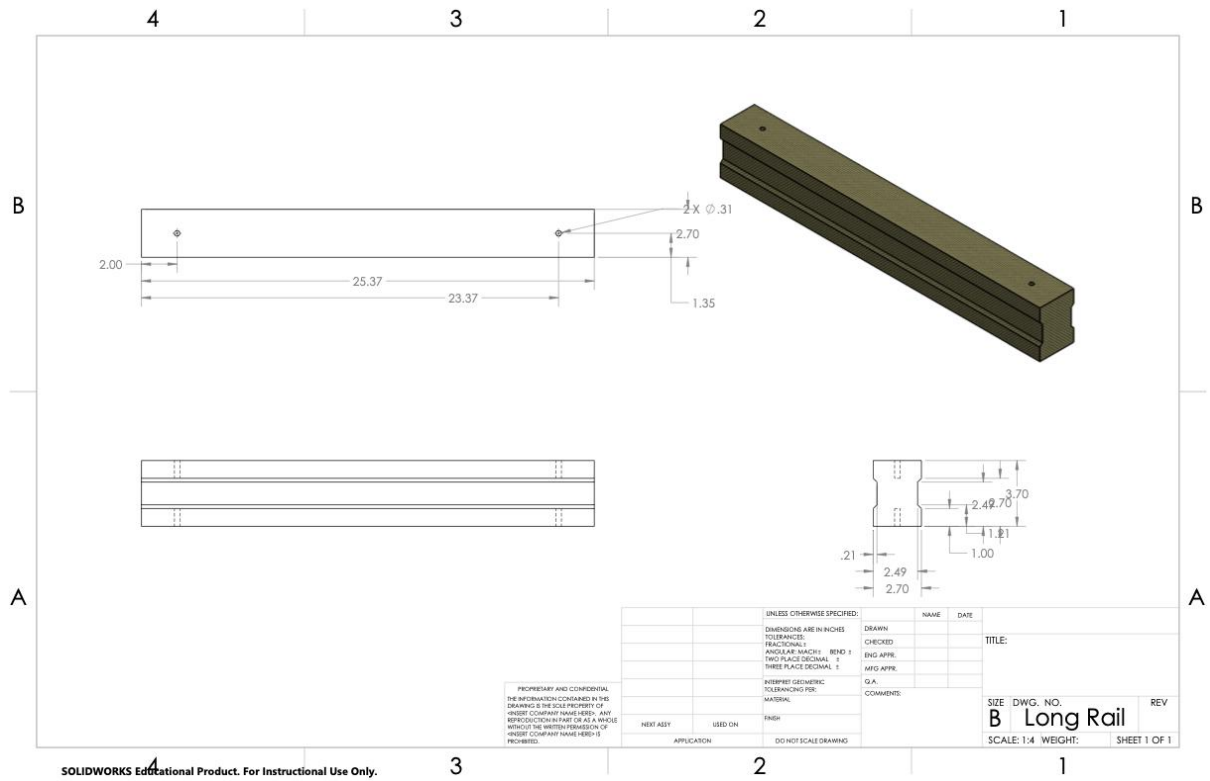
CAD drawing of Long rail that supports the body structure of the rover. 0.64 m (L) x 0.07 m (W) x 0.09 m (H) Material: Thornel VCB-20 Carbon Cloth
